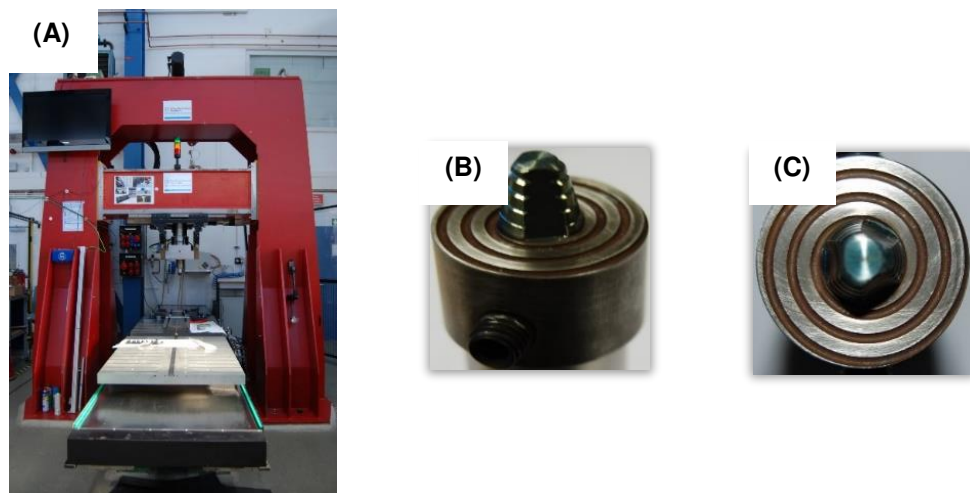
(A) Portal Anlage weld machine, (B) picture of the probe, and (C) of the shoulder.
